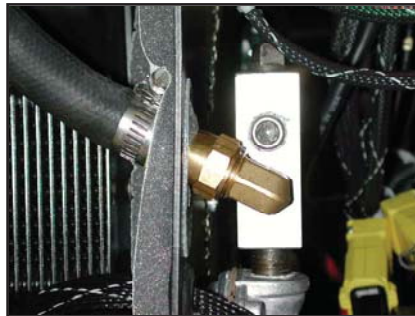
, Load Block, PN-6x-T 7.5kW
